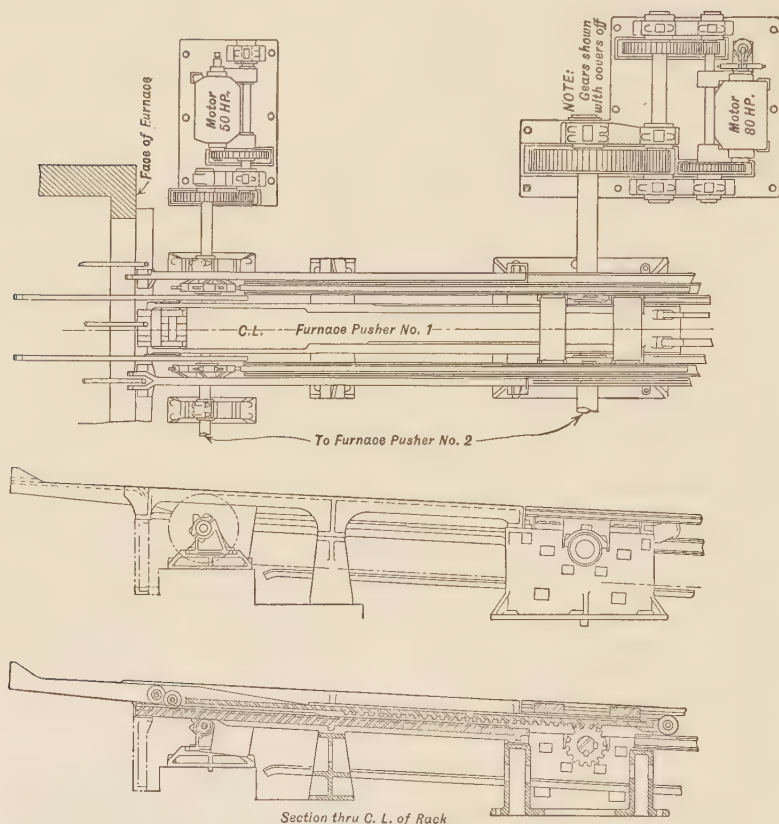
Furnace pusher of the rack and pinion type. This pusher is combined with a transfer for steel bars.
